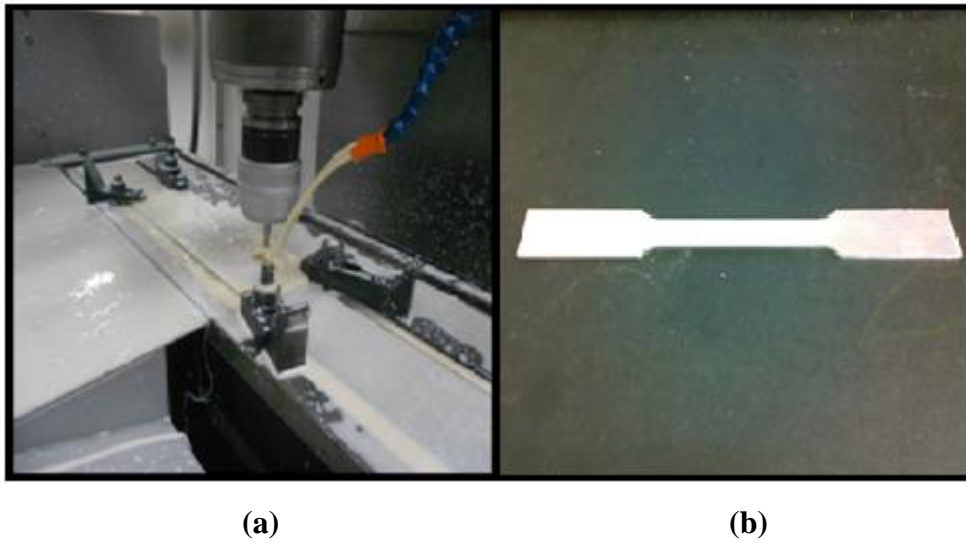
(a) CNC milling process (b) Finish tensile specimen
